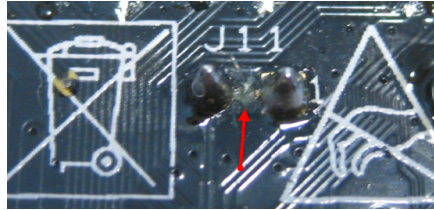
Step 2: Cut the solder jumper - SJ11;
